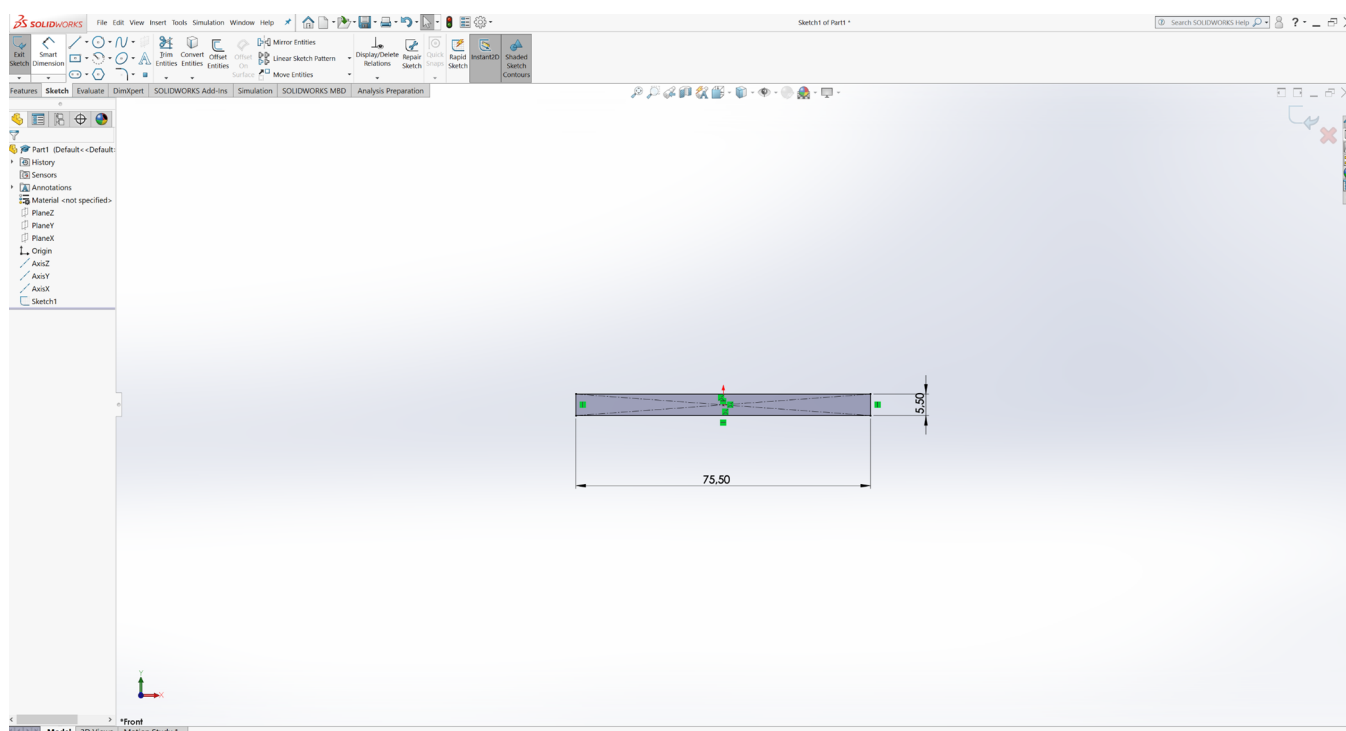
SolidWorks user interface. A sketch with defining dimensions.
